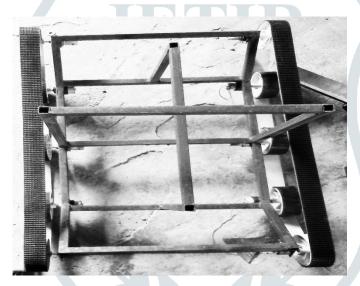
Final Live Model with frame, wheels, motor and conveyor
